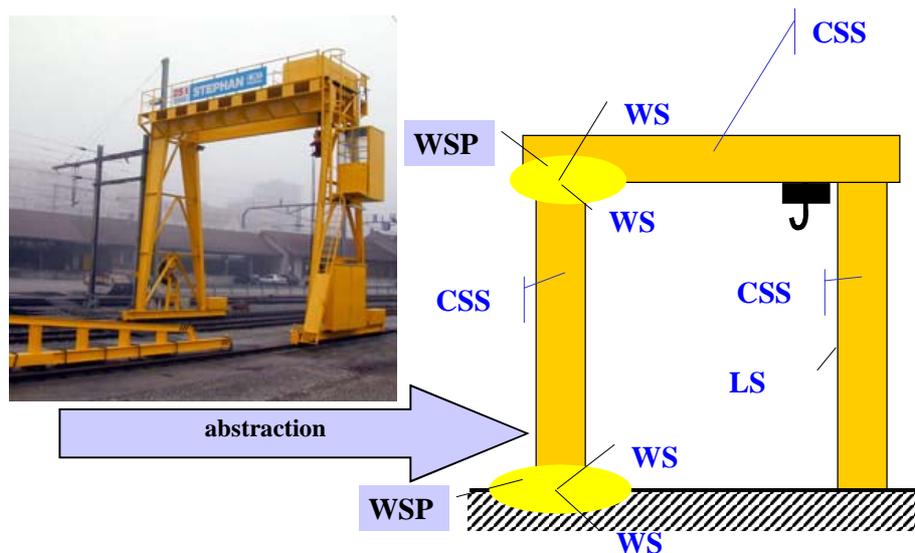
A Crane abstracted to its Working Surface Pairs and Channel and Support Structures
